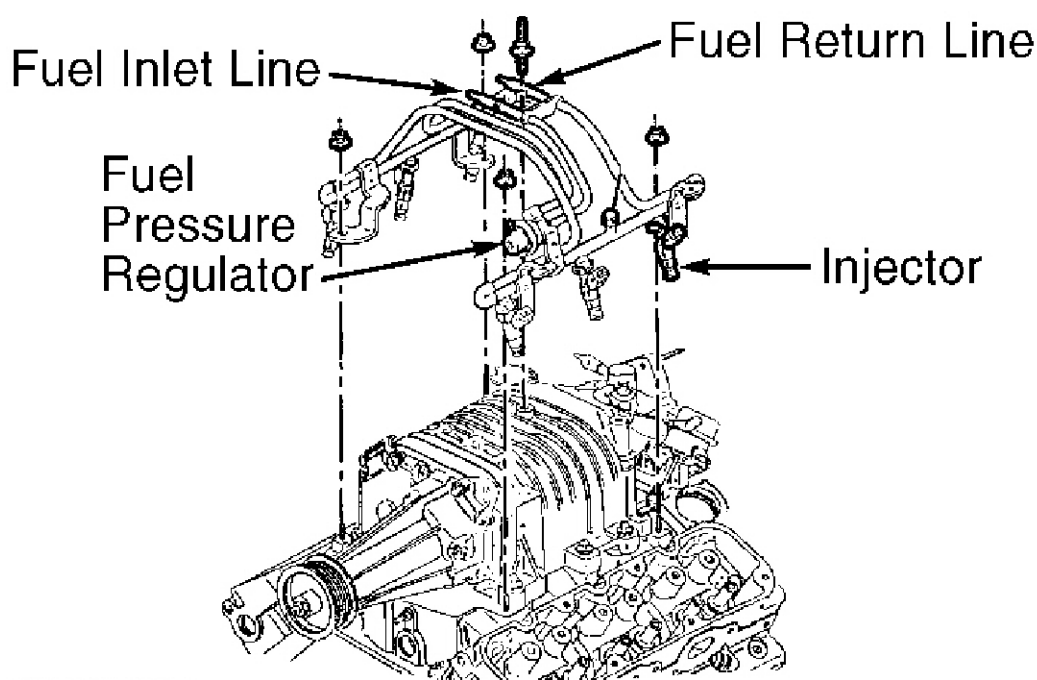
Locating Fuel Rail Assembly Components (3.5L - VIN H)
